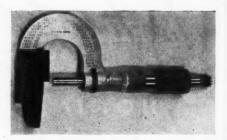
Illustration showing modified micrometer for measuring tapered work.
